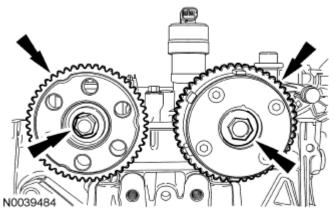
Locating Camshaft Sprockets And Bolts Courtesy of FORD MOTOR CO.
